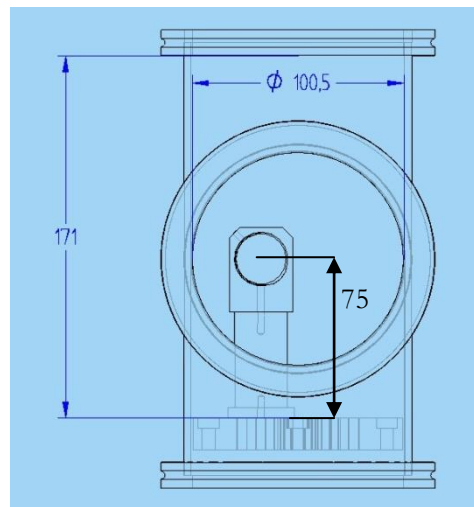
Dimensions of the UHV chamber where the mirror switch will be installed.
